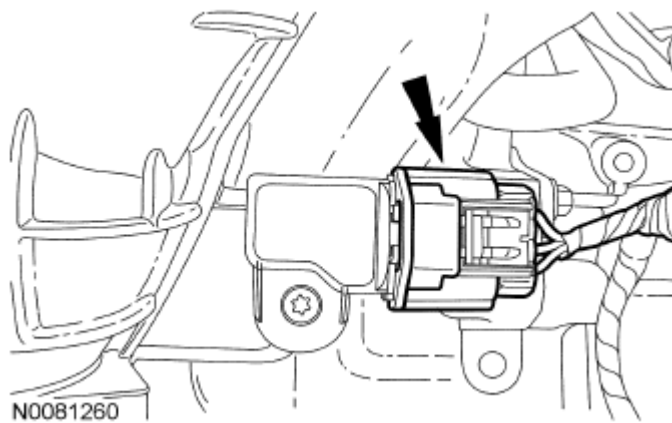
Locating Manifold Absolute Pressure Sensor Electrical Connector
